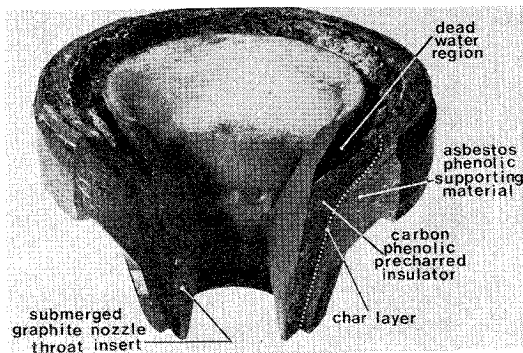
Submerged nozzle configuration after 60-sec test firing.
